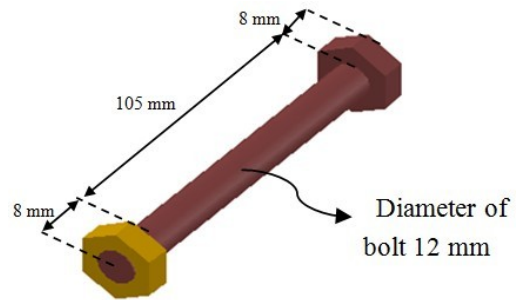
Details and dimensions of Rubber channel, screw and nut
